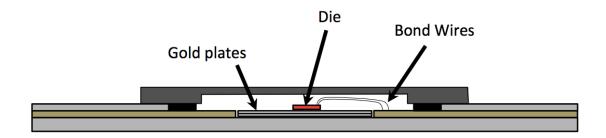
Die raised by gold plates in the PGA package for high angle testing.
